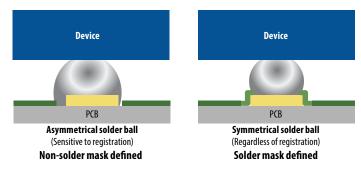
Effect of copper to solder mask layer registration on the solder ball symmetry.
